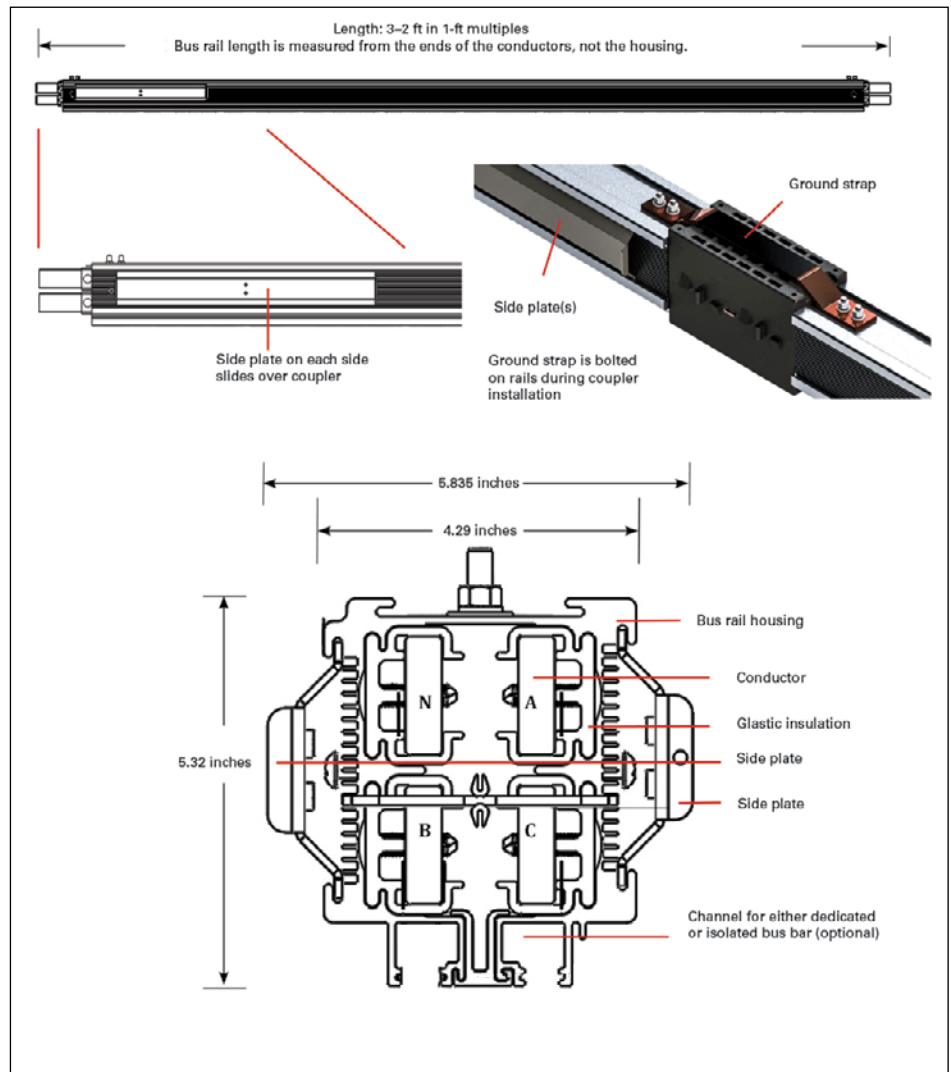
Standard Rail Cross-Section with Side Plates (600–1000 A)
